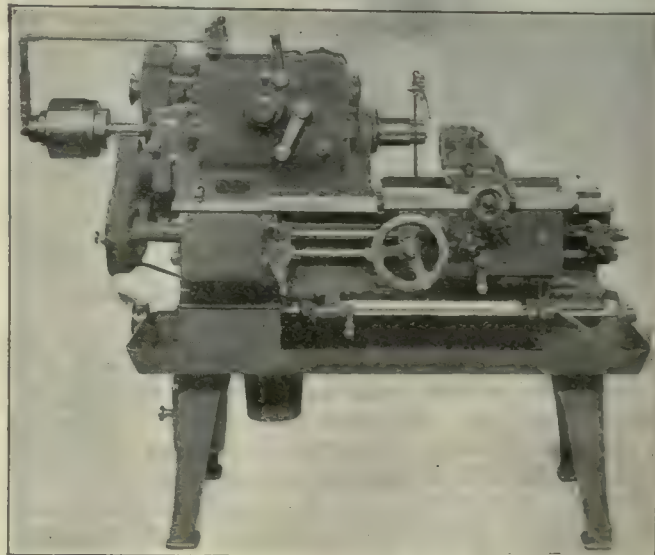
"STANDARD" GEARED-HEAD ENGINE LATHE
